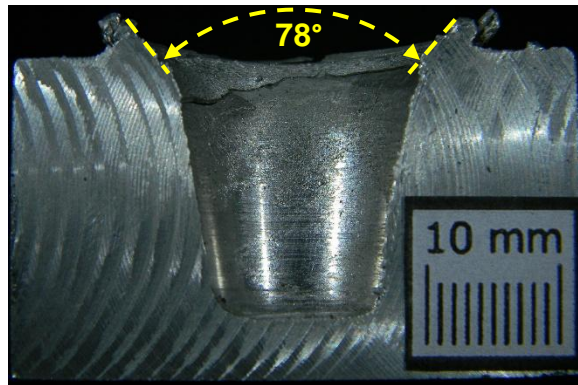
Weld TW-4 with Weld Nugget Removed
